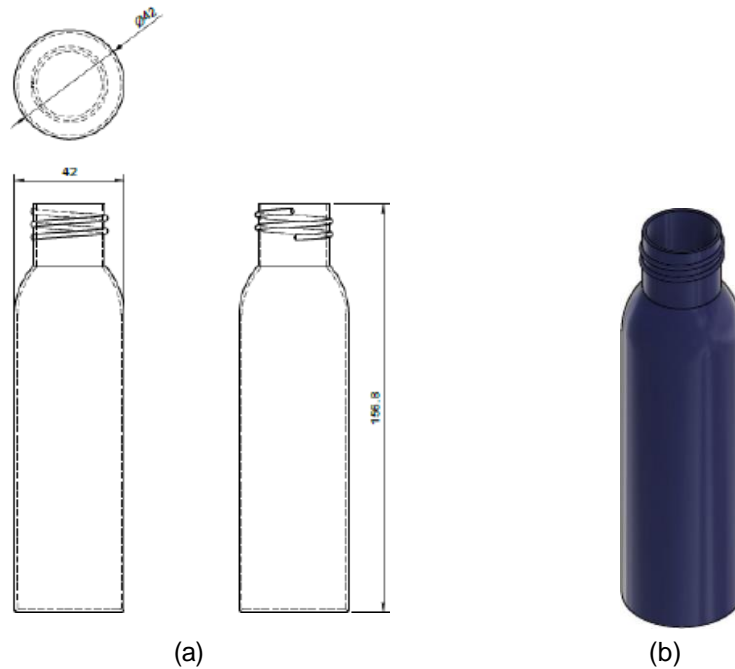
Lower body part (a) projected view and (b) drawn in Autodesk Fusion 360
